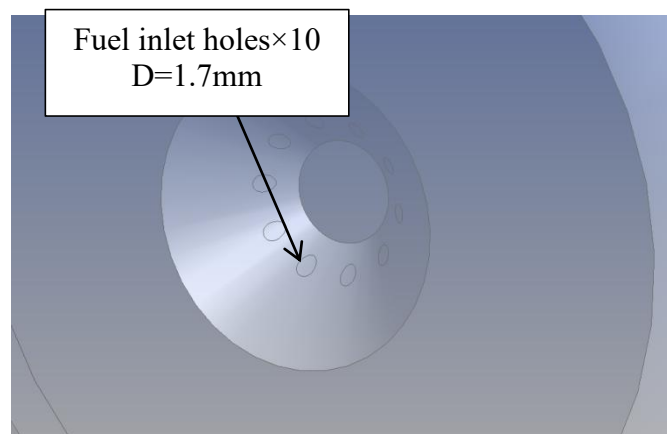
conventional combustor fuel injector with fuel inlet holes.
